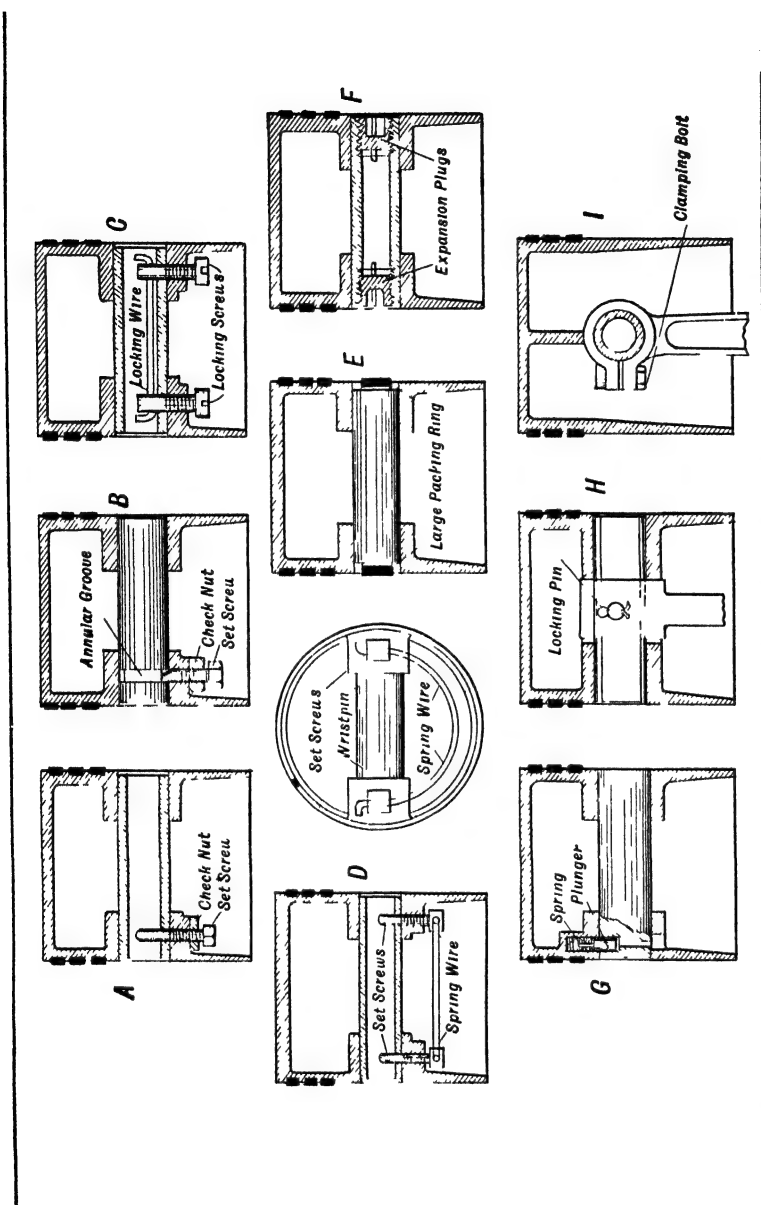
Typical Methods of Piston Pin Retention that Have Been Used in Gasoline Engines of American Design. A—Single Set Screw and Lock Nut. B—Set Screw Fitting Groove in Wristpin. C and D—Two Locking Screws Fastened Into the Interior of a Hollow Wristpin. E—Split Ring Holds Pin in Place. F—Use of Tapered Expanding Plugs Outlined. G—Spring Pressed Plunger Type. H—Piston Pin Pinned to Connecting Rod. I—Wristpin Clamped in Connecting Rod Small End by a Bolt.
